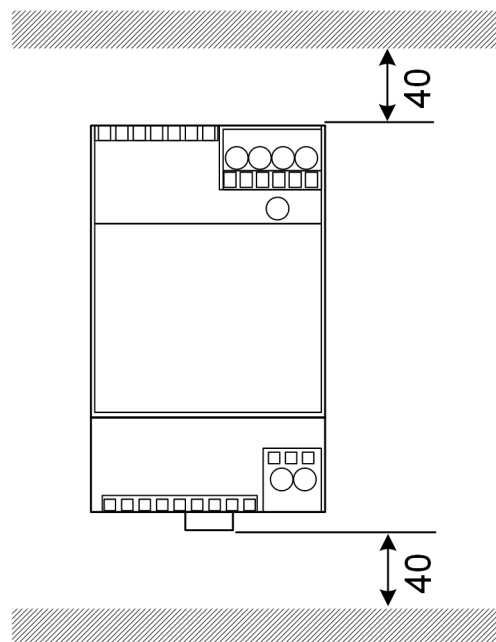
Power adapter space requirement (dimensions in mm) for control cabinet installation
